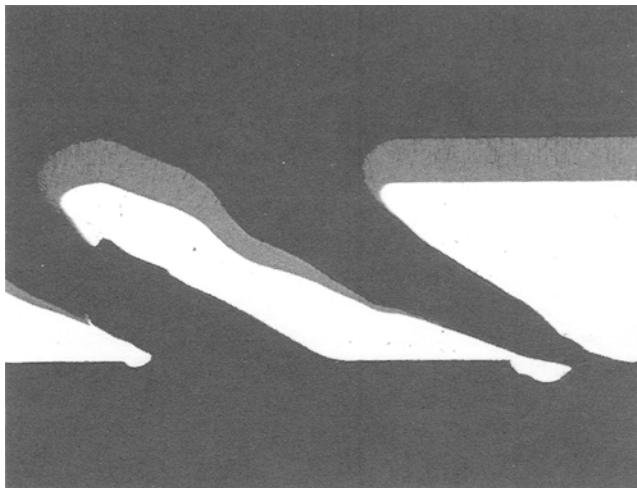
Component showing PVD coating in region of cooling holes. Deposit is approximately 350 μm (0.014 in.) thick. The atomistic nature of the PVD coating process results in a rapidly, smoothly tapered coating at the hole entrance. Laser drilling usually results in the throat of the hole (the narrowest dimension) to be located near the interior end of the hole.
